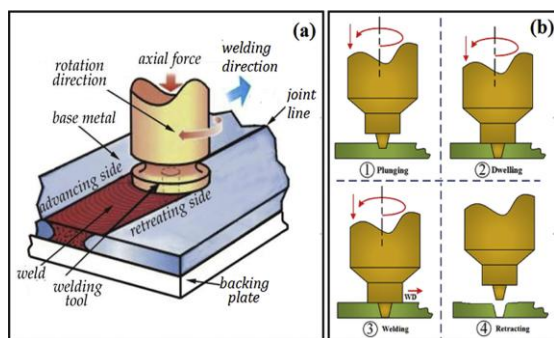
(a) Friction stir welding Process and 2(b) stages in FSW
